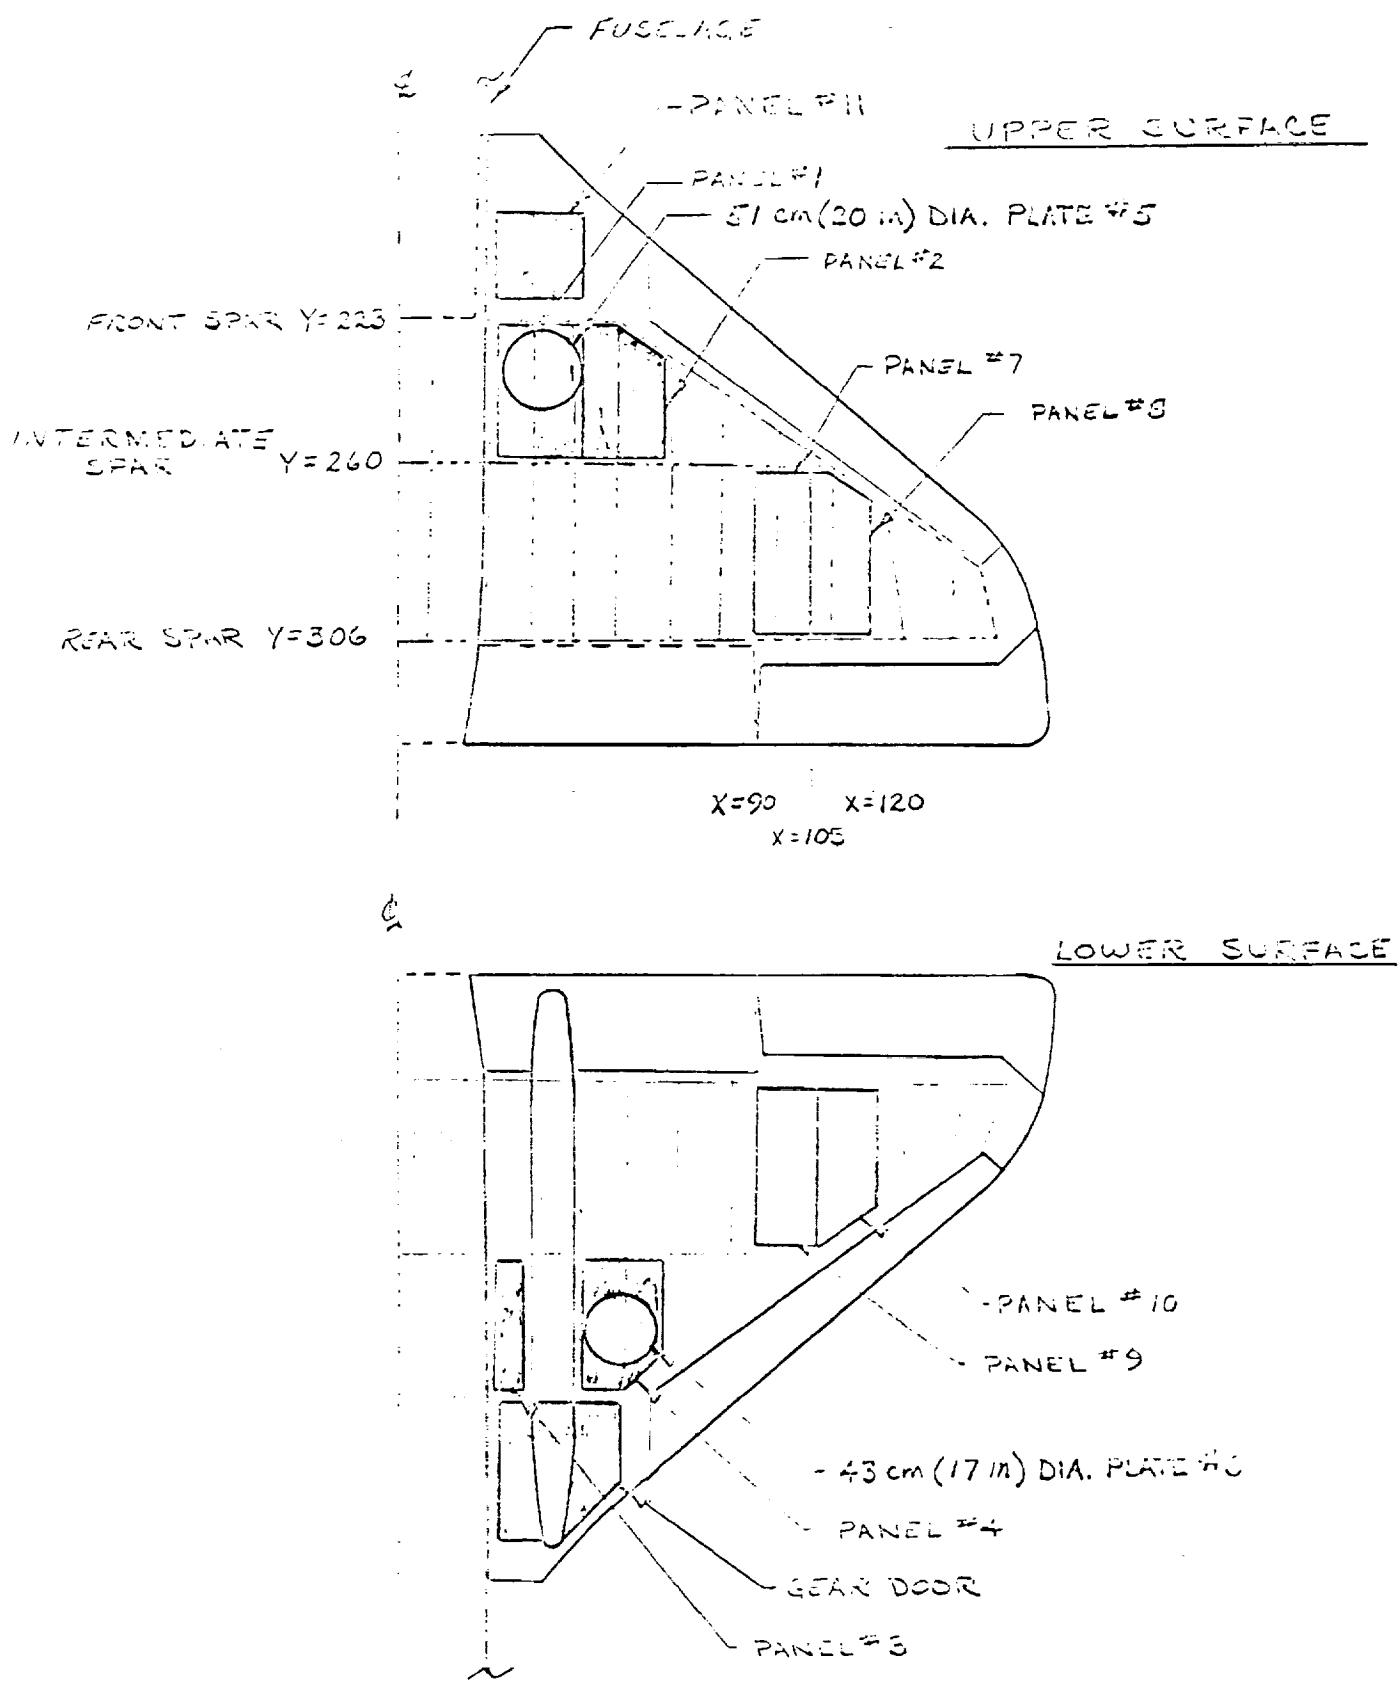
HOLE CONFIGURATION #13. ALL INBOARD PANELS & PLATES REMOVED;
